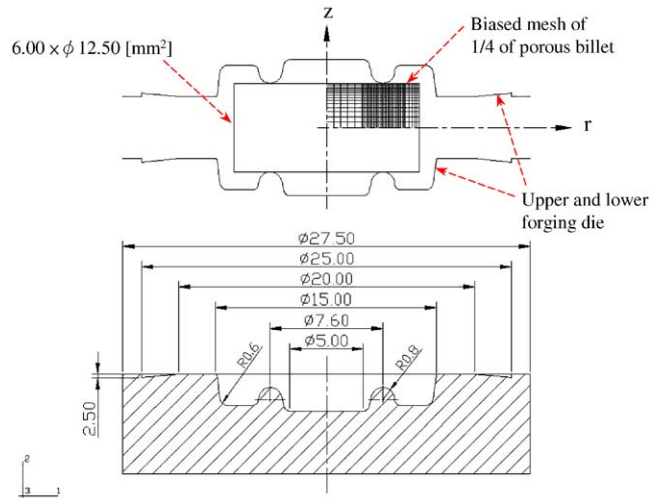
Profiles of the preform and the die in forging the gear blank.
